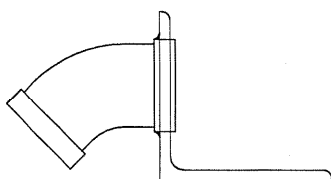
45°-Bracket and Elbow (P/N 263362)
